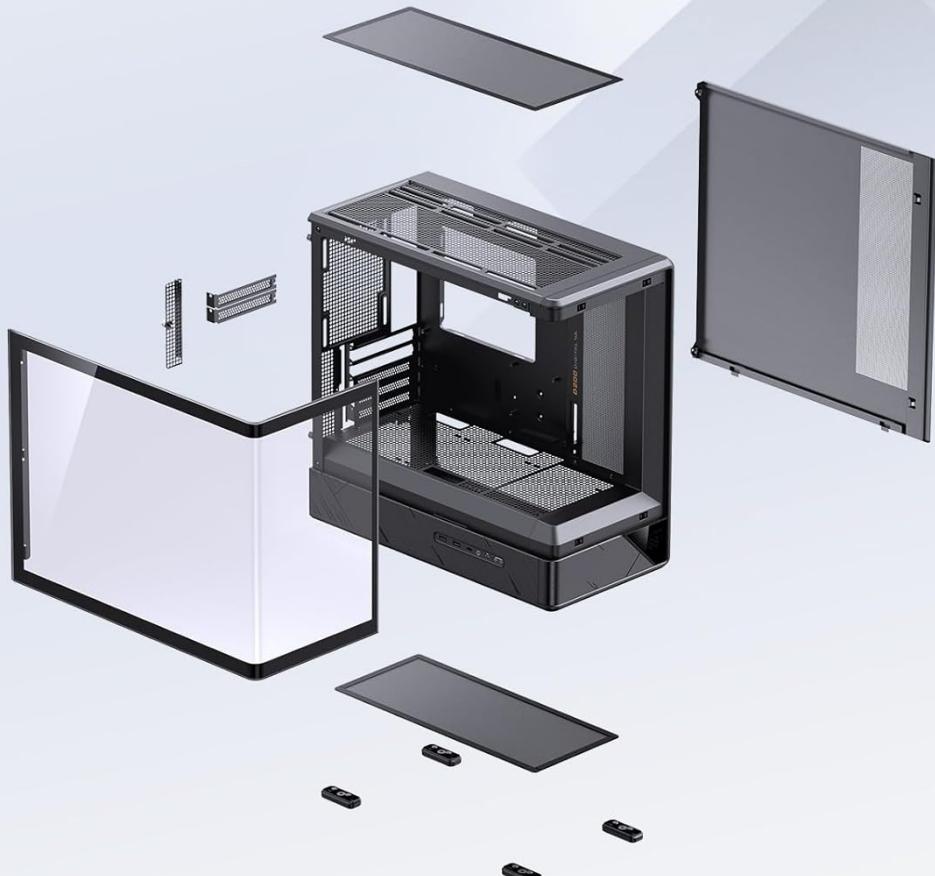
Exploded view demonstrating the convenient disassembly of panels for easy access.
